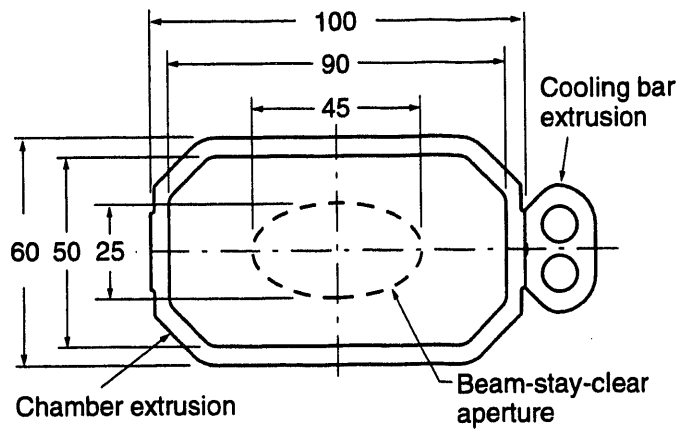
HER vacuum chamber cross section at a quadrupole ; dimensions are in millimeters.
